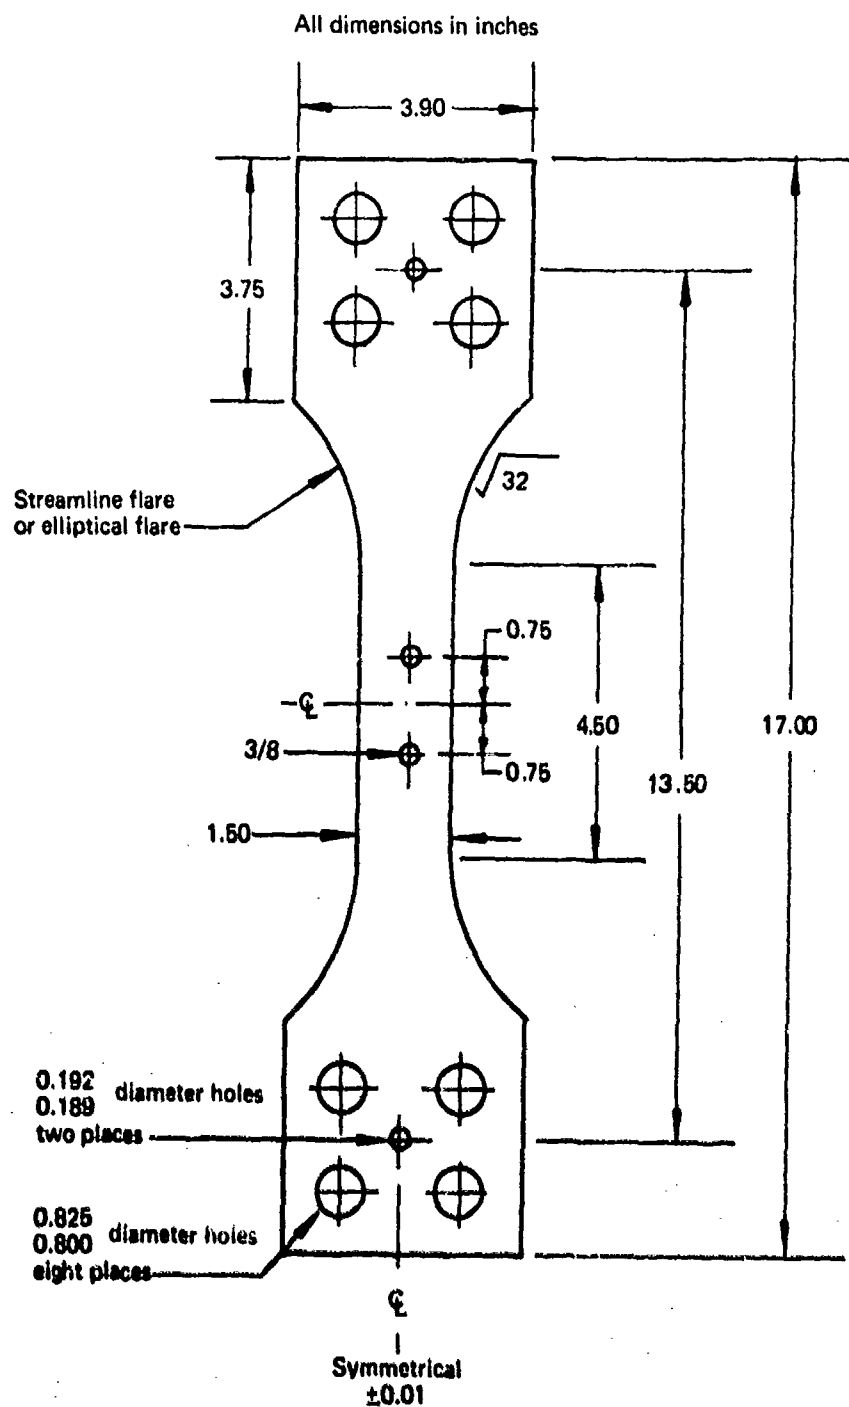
Zero Load Transfer Baseline Fatigue Coupon -3/8-In.-Diameter Holes
